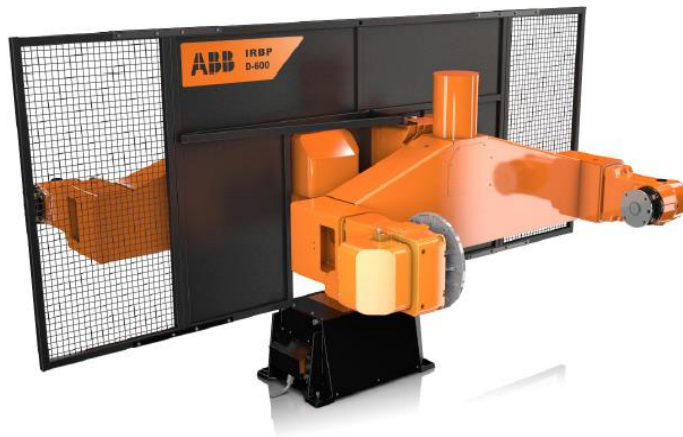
Four axis welding positioner (ABB, 2016)
